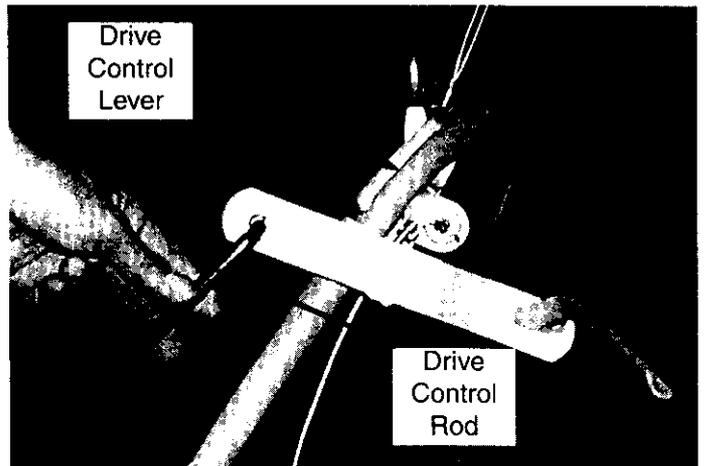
Put the bent end of the rod through the hole of the drive clutch lever.
